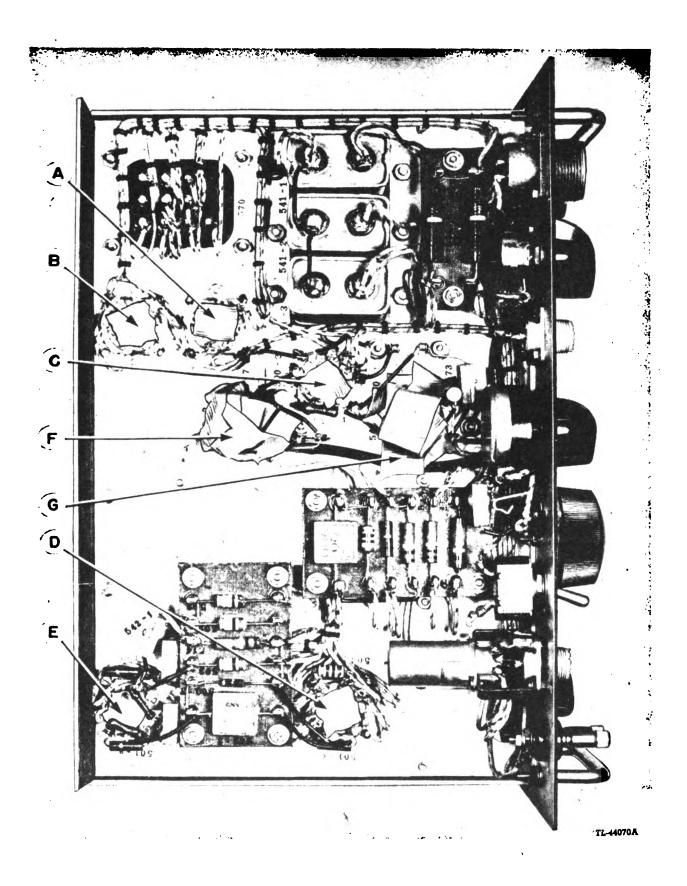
Test Set TS-159/TPX, bottom view, showing masking.
